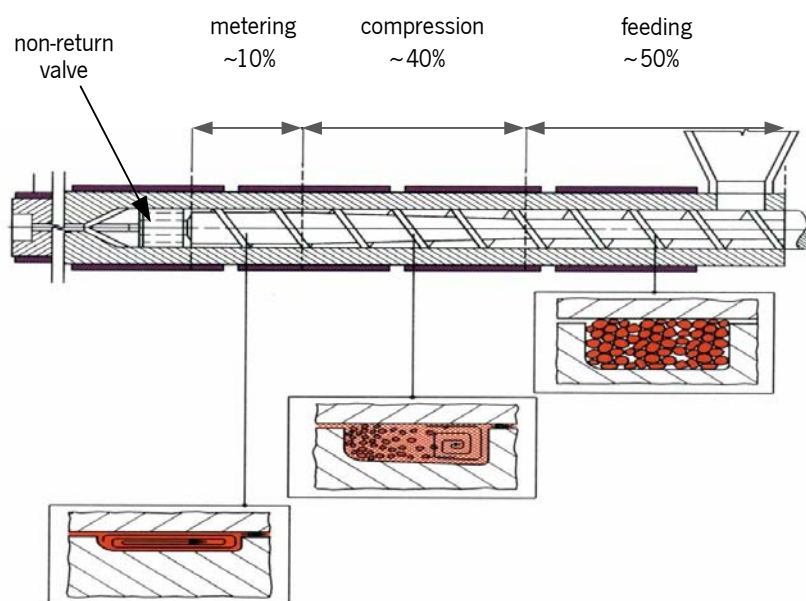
Screw functional sections for a powder injection moulding machine (courtesy of Arburg).
